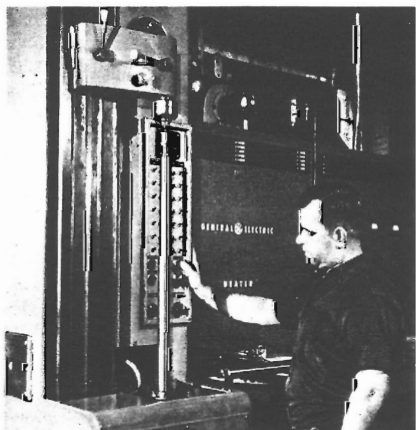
Twister-roll hardening at 530 kc in a textile machinery plant. (*Whitin Machine Works.*)
